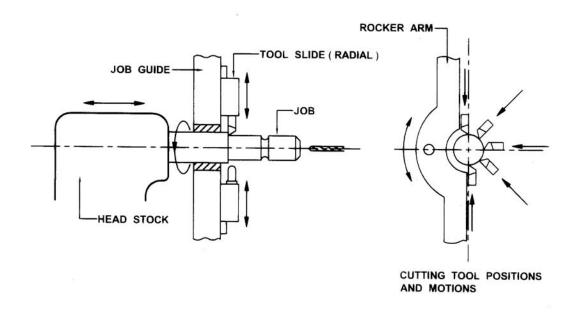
Basic principle of Swiss type automatic lathe.
